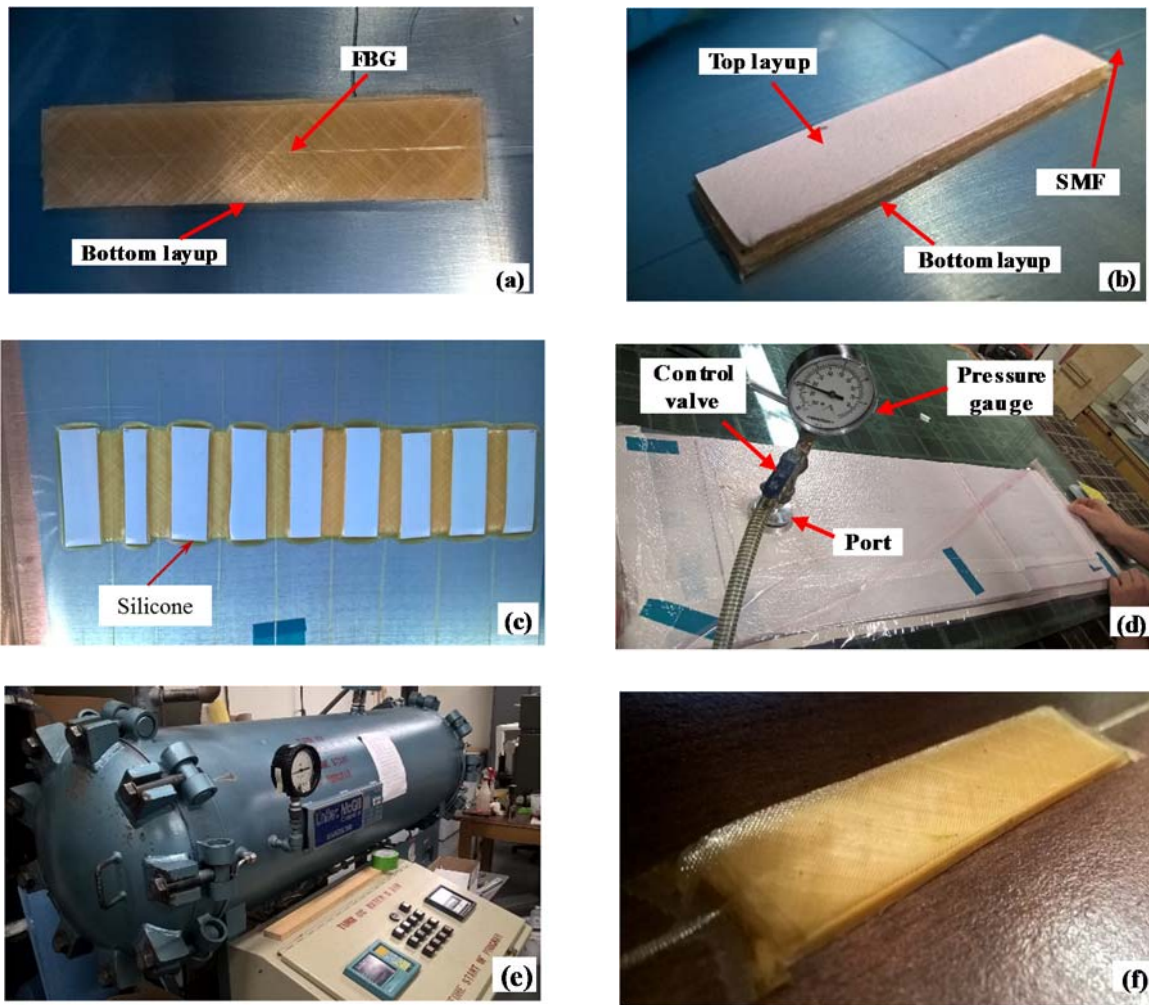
Fabrication process for embedding an FBG sensor in a composite laminate: (a) preparation of bottom layup; (b) sandwiching FBG between top and bottom layup; (c) surrounding layups with silicone at both sides; (d) vacuum bagging sensor package; (e) curing in autoclave; (f) fabricated FBG-composite sensor.
